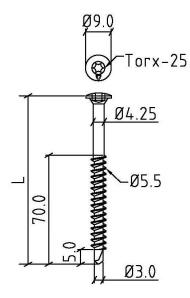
BS 5.5 Screw for fixing in steel sheets
